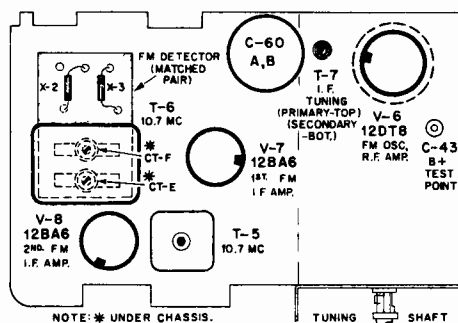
TUBE LOCATION AND ALIGNMENT POINTS, FM SECTION, CHASSIS 120574-B
